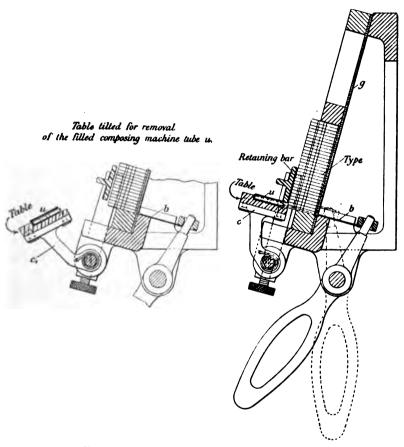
Wicks type-slicer. Scale : 1 full size.
